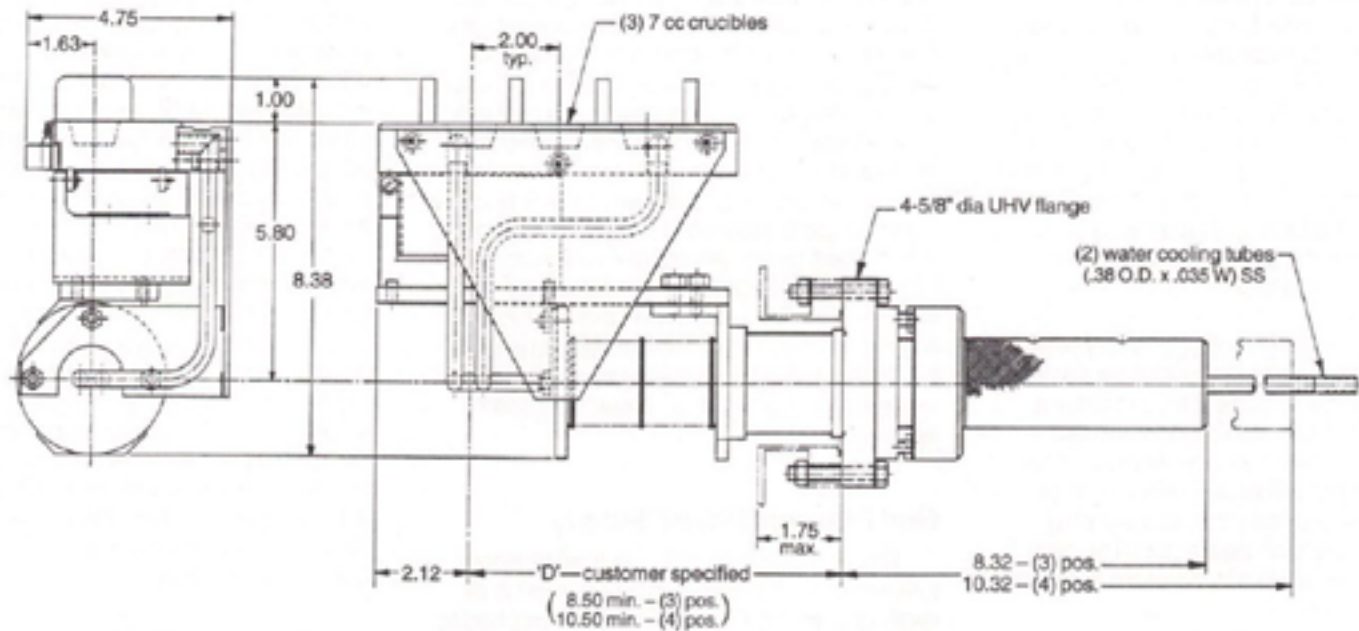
Dimensional drawing of Model 600-0060-33 (e-Gun shown fully retracted).
